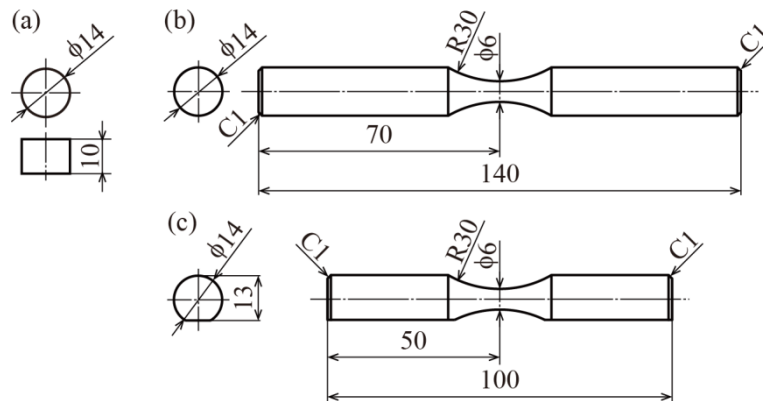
Specimen shapes (mm): (a) button specimen; (b) tensile specimen; (c) fatigue specimen.
